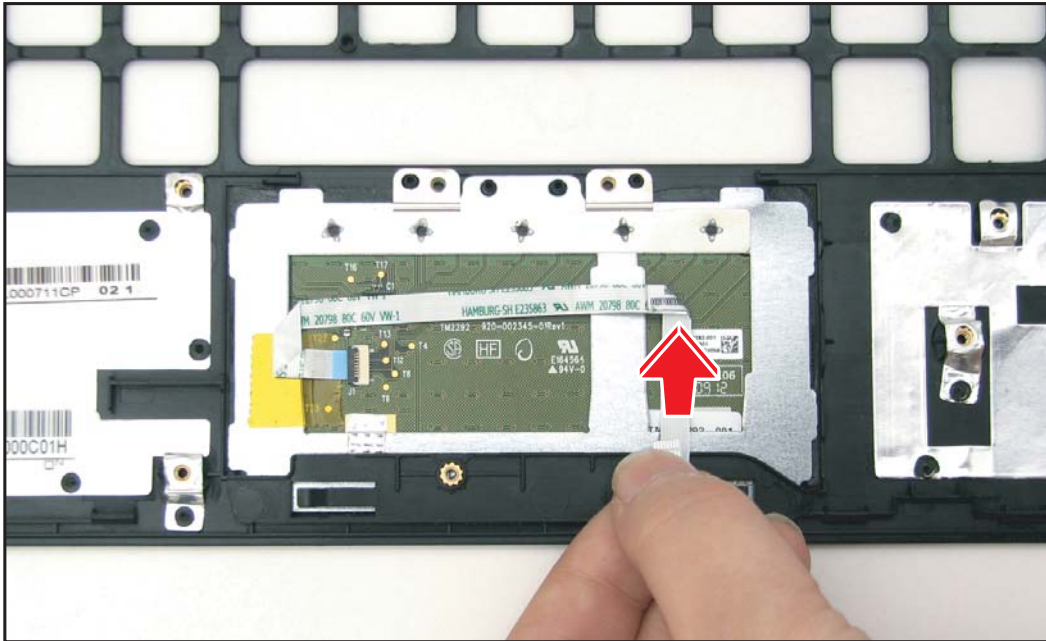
80. Removing the Touchpad Cable (1 of 2)
